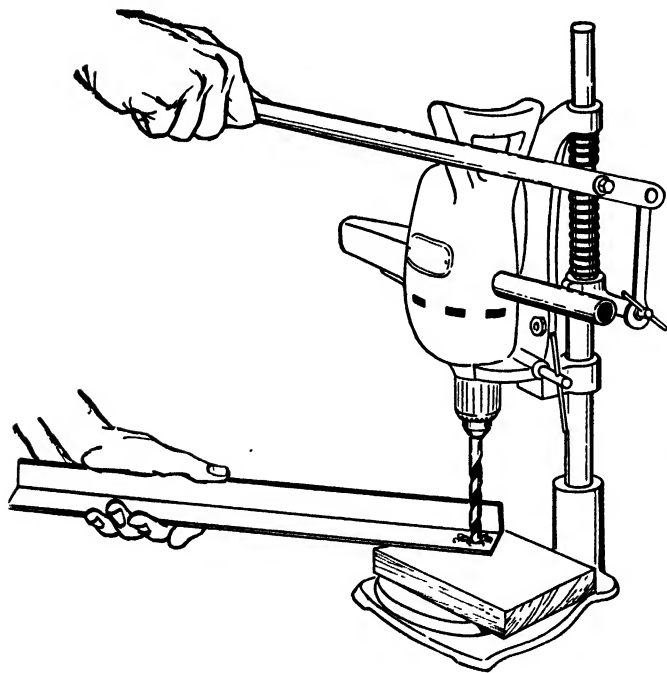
The electric drill mounted in a drill stand can be used as a drill press.
